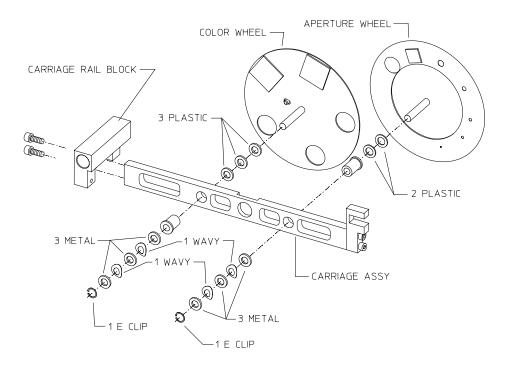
Color Wheel/Aperture Wheel Removal
